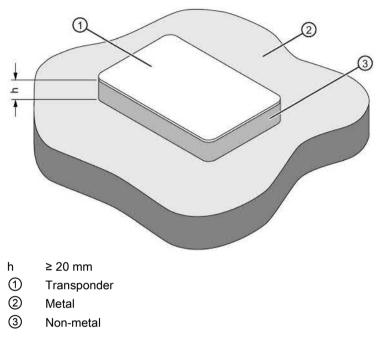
Mounting of the MDS D400 on metal with spacer
